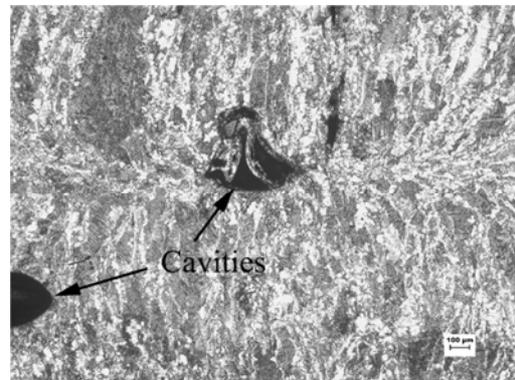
Cavities in microstructure of weld nugget; steel sheet of thickness 2.5 mm.
